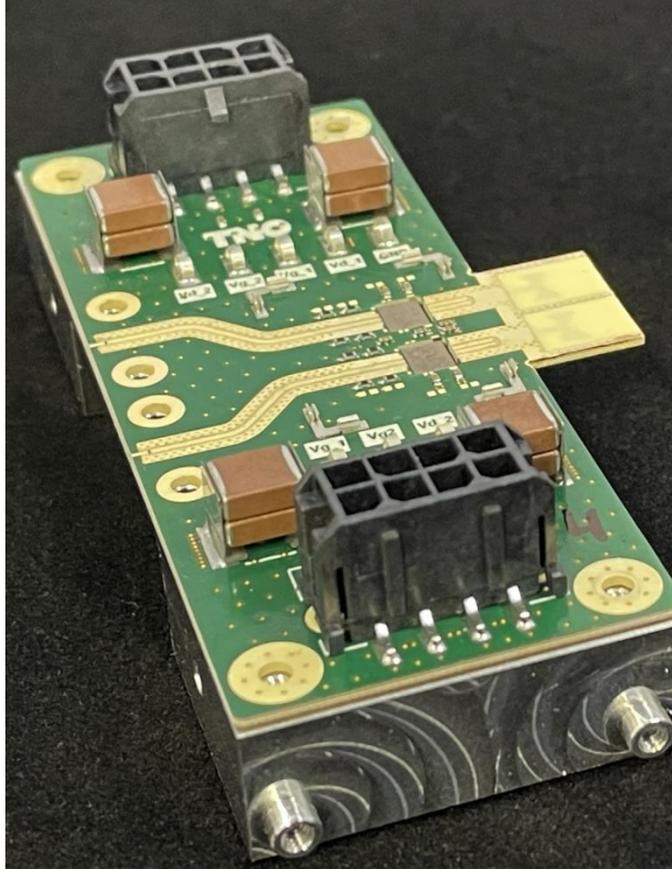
DRIFT Assembled Demonstrator PCB.
